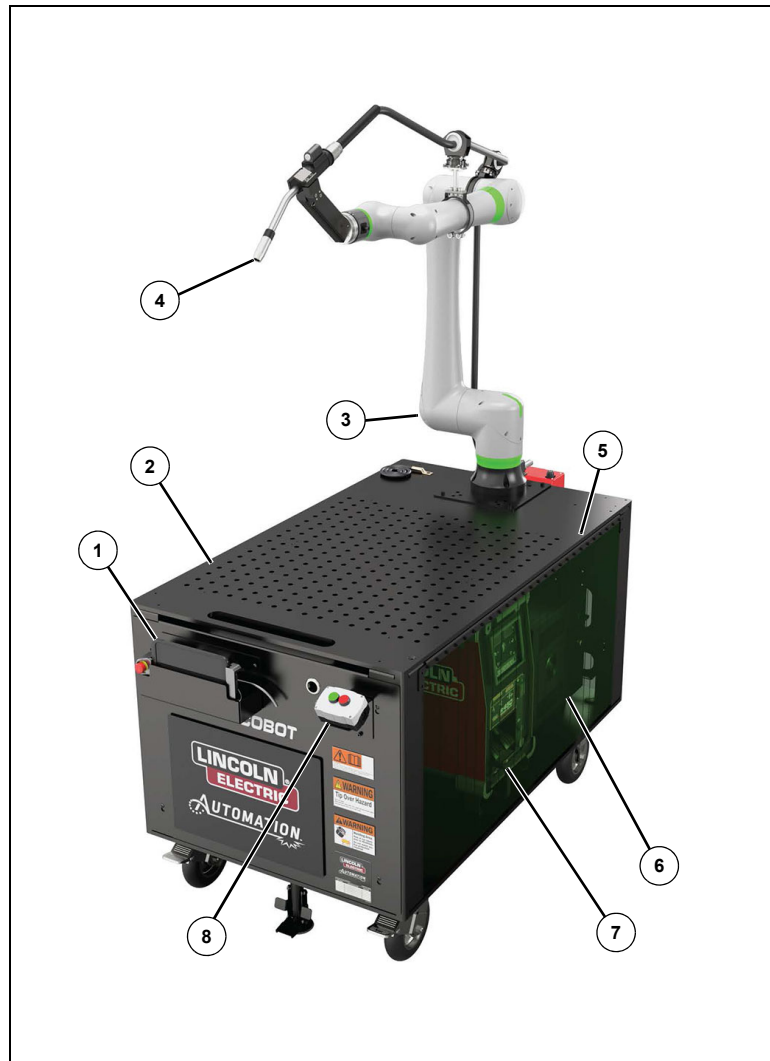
Cooper CRX-10iA Air-Cooled Wire Brake Cobot Cart
